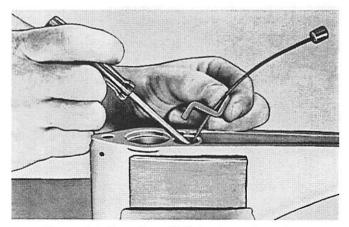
Installing Shift Linkage Assembly in Trip Finger Chamber
